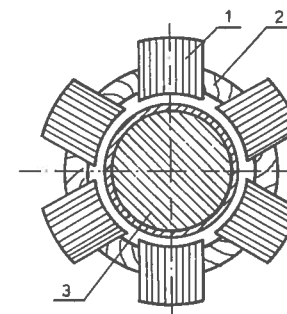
Laminated core of a tubular, single-sided LIM consisting of six segments: 1 — single segment, 2 — primary winding, 3 — double-layer secondary.
